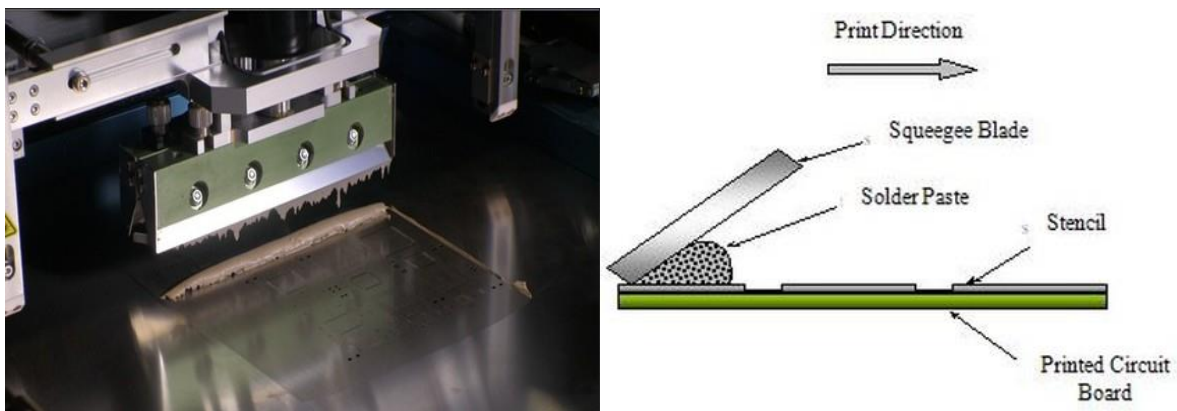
A Picture of Stencil Printer and Cross-Section View of a Squeegee Printing Solder Paste on Stencil
